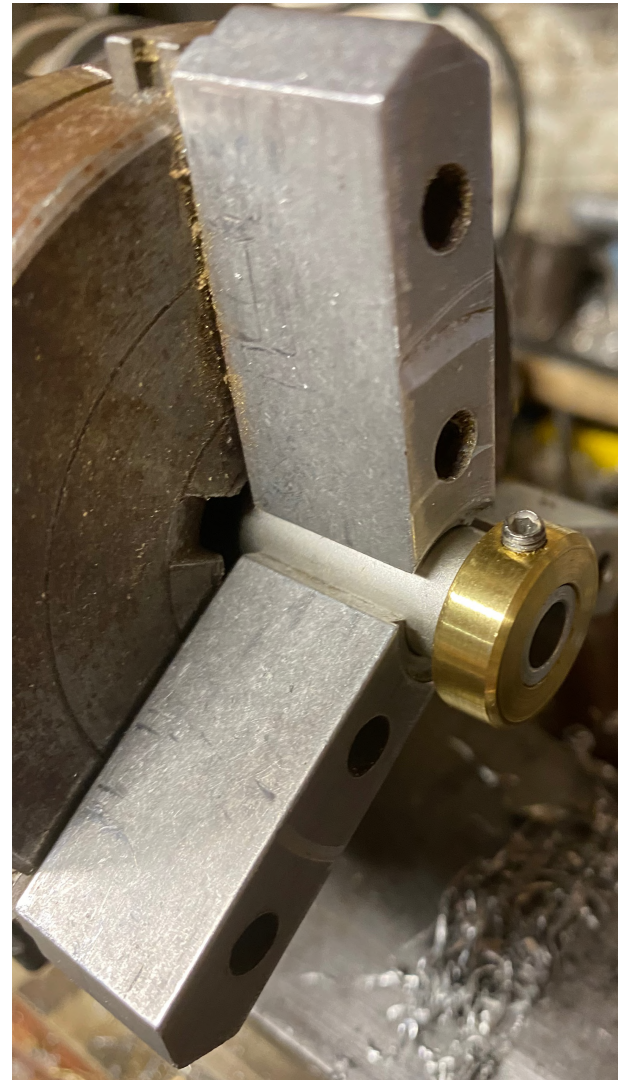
Fitting the brass collar to a recessed shoulder on the billet.
